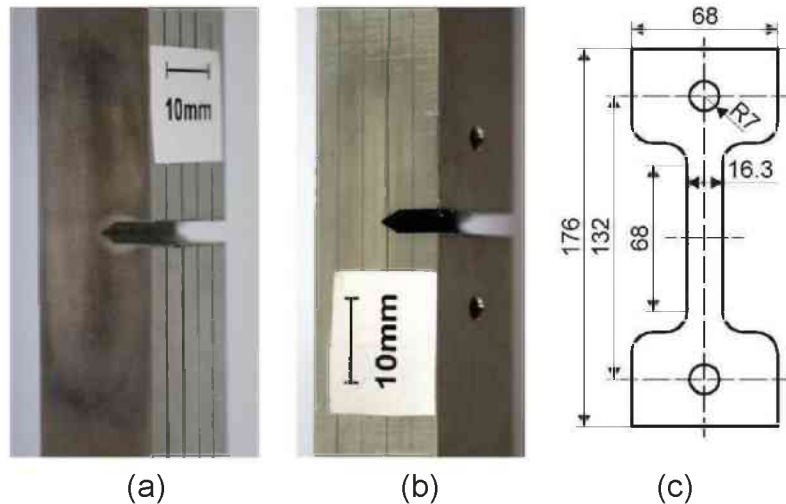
Notched and pre-fatigued areas of the (a) crack divider and (b) crack arrester configurations. (c) Outer dimensions of the laser cut aluminum sheets.
